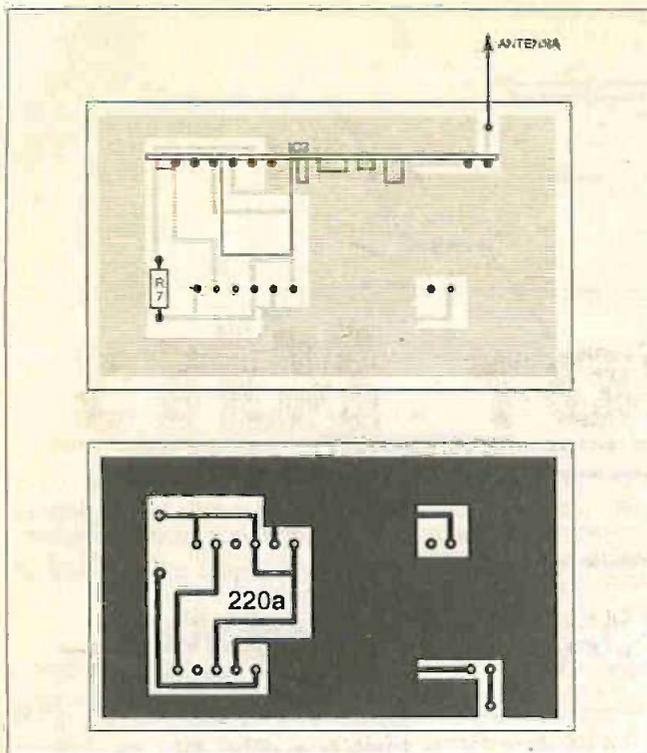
F.M. Receiver adaptor printed circuit board details.
